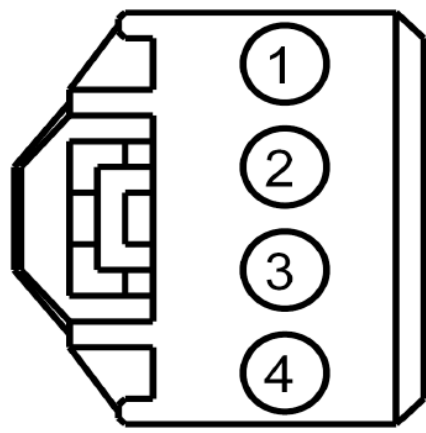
Front Blower Motor Speed Controller Connector End View (C271)
